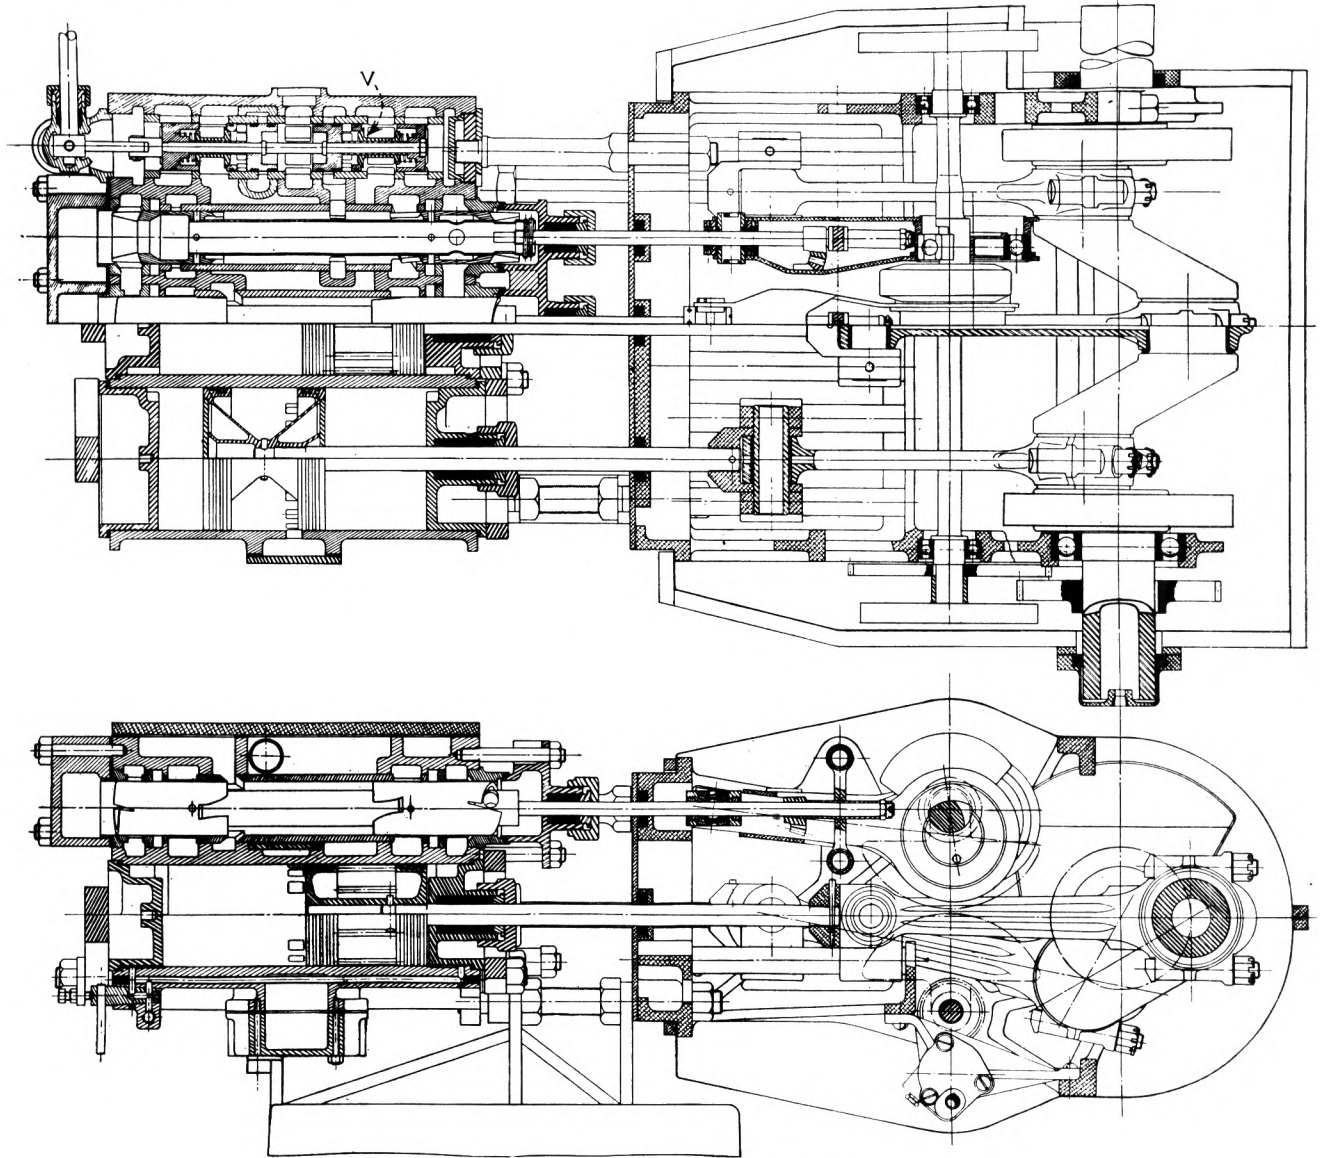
PLAN AND CROSS SECTION OF THE ENGINE
